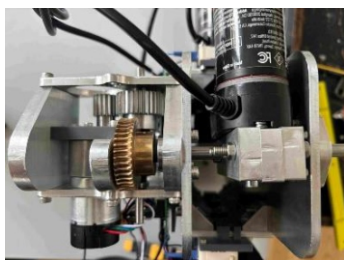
(a) CAD-model-and-exploded-view-of-the-worm-gearbox-used-in-the-Stinger-Robot-a-Assembled
